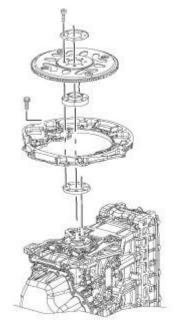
FLYWHEEL AND FLEX PLATE Courtesy of CHRYSLER LLC
